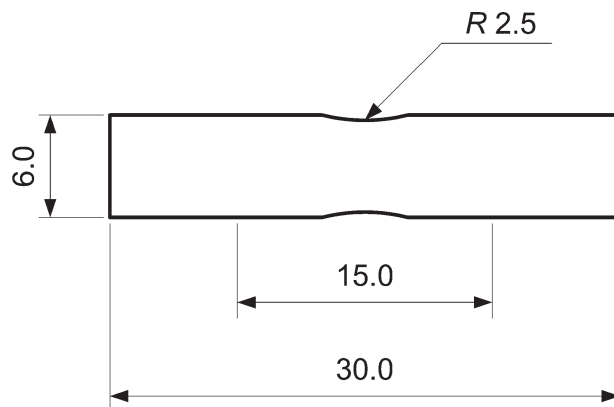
Geometry of specimen 0.5 mm in thickness. Dimensions are in mm.
